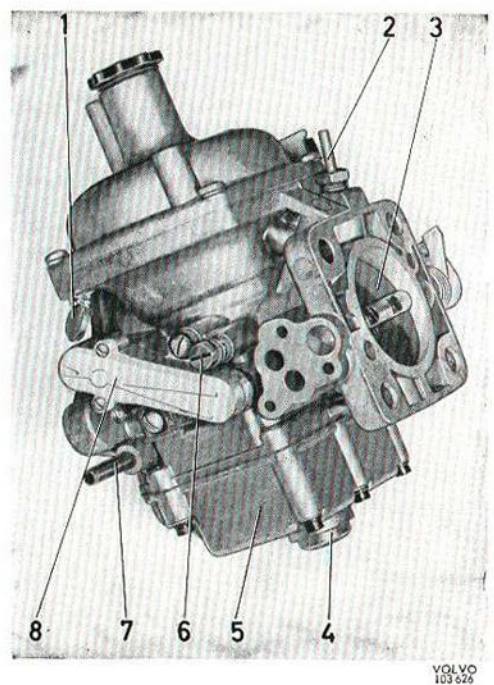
Stromberg-carburetor, right side, B 20 A
